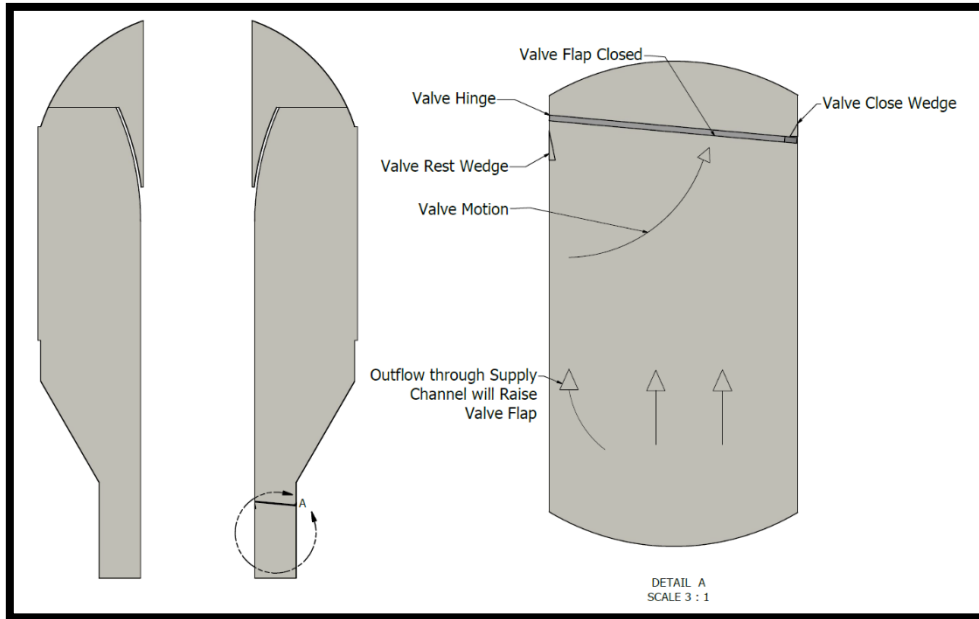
Valve in Closed Position Preventing Further Outflow
